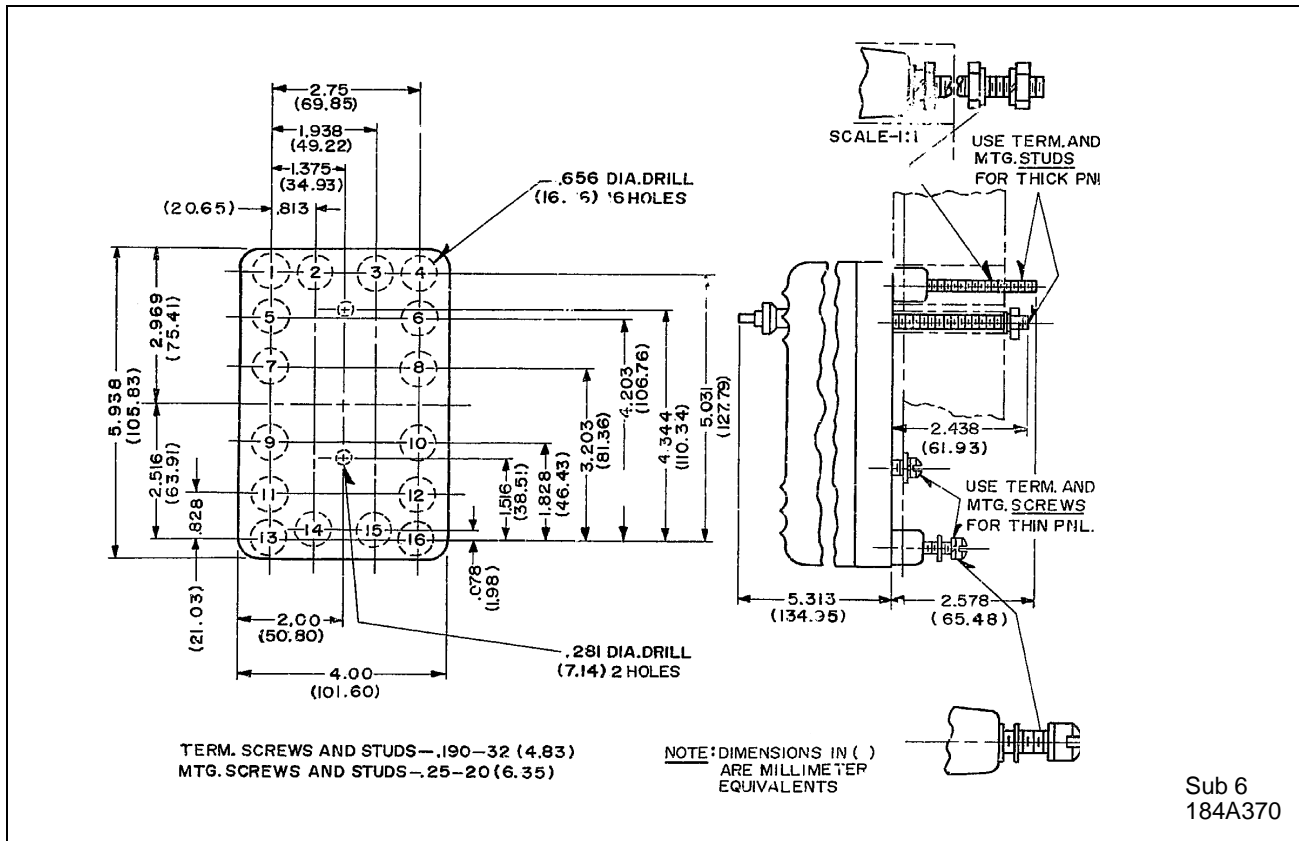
Outline and Drilling Plan for the Type MG-6 Relay in the Rear Connected Molded Case. For Reference Only.
